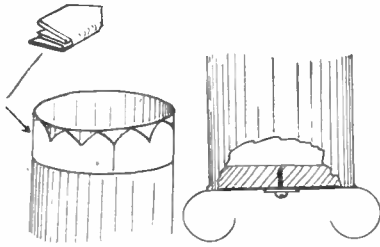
Marking the top edge Fig. 3—Cut-away view of bottom
